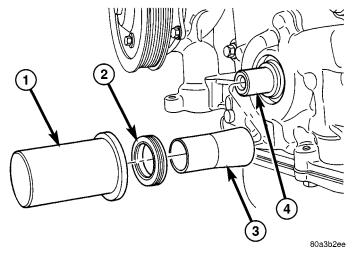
CRANKSHAFT FRONT SEAL INSTALLATION
